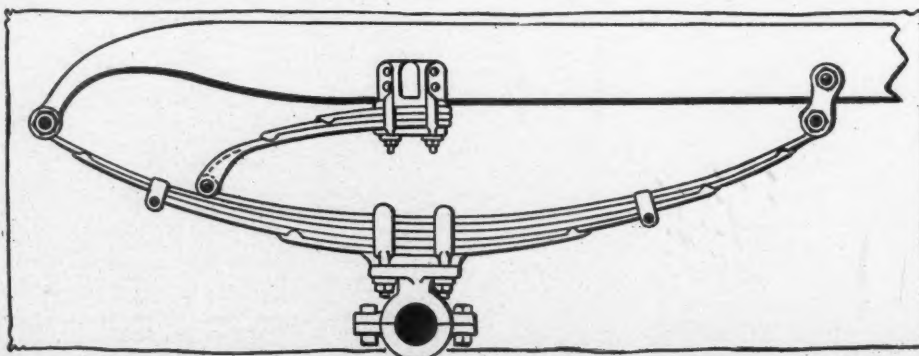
COMBINATION FRONT MOTOR CAR SPRING
